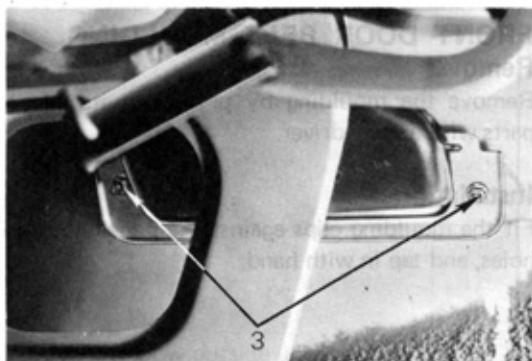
Roof Side Bent Louver & Duct Removal (2)
